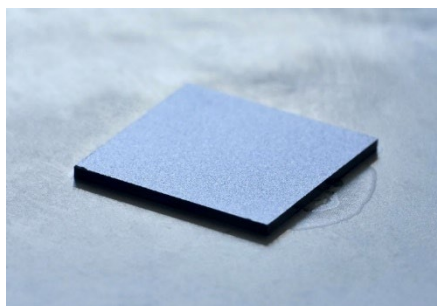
Thermo-compressively joined silicon chip (InSn solder - vapor-deposited) on TECAWAFER PEEK LDS black
